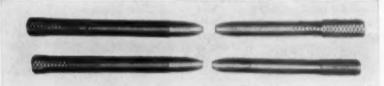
Pressure welded tensile test specimen of annealed copper to 1100 aluminum %" diameter rod.
